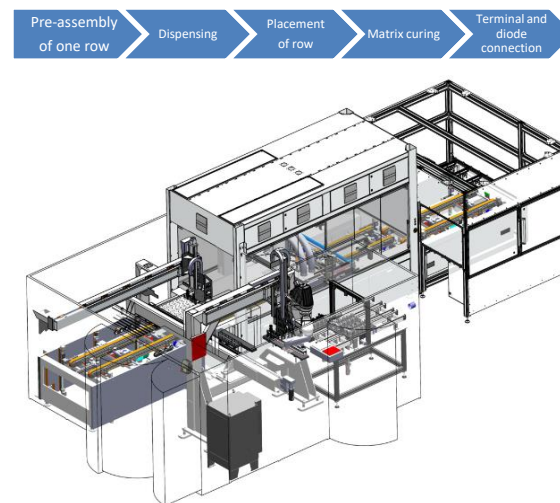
Prototype Shingle Matrix Stringer developed in the project SHIRKAN by M10 Solar Equipment.
